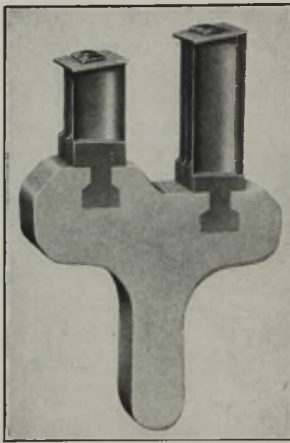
Segment cut from a Curtis turbine wheel, showing the dovetail attachment of the buckets to the wheel disk.
